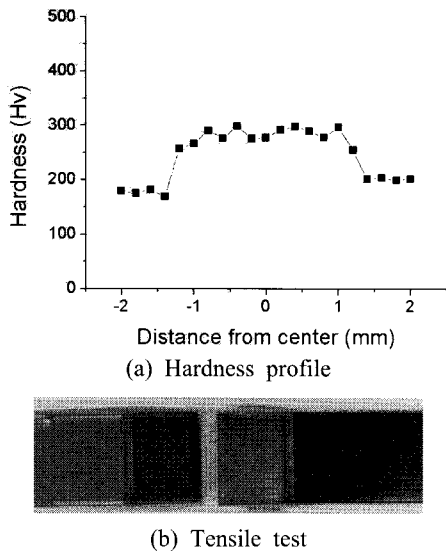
Mechanical tests of laser weldment for CR590DP (1mm).
